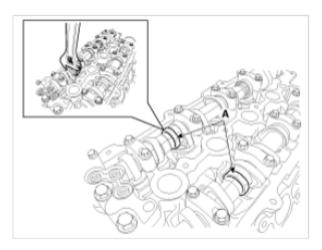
Preventing Camshaft Rotation Using Wrench Courtesy of HYUNDAI MOTOR AMERICA
